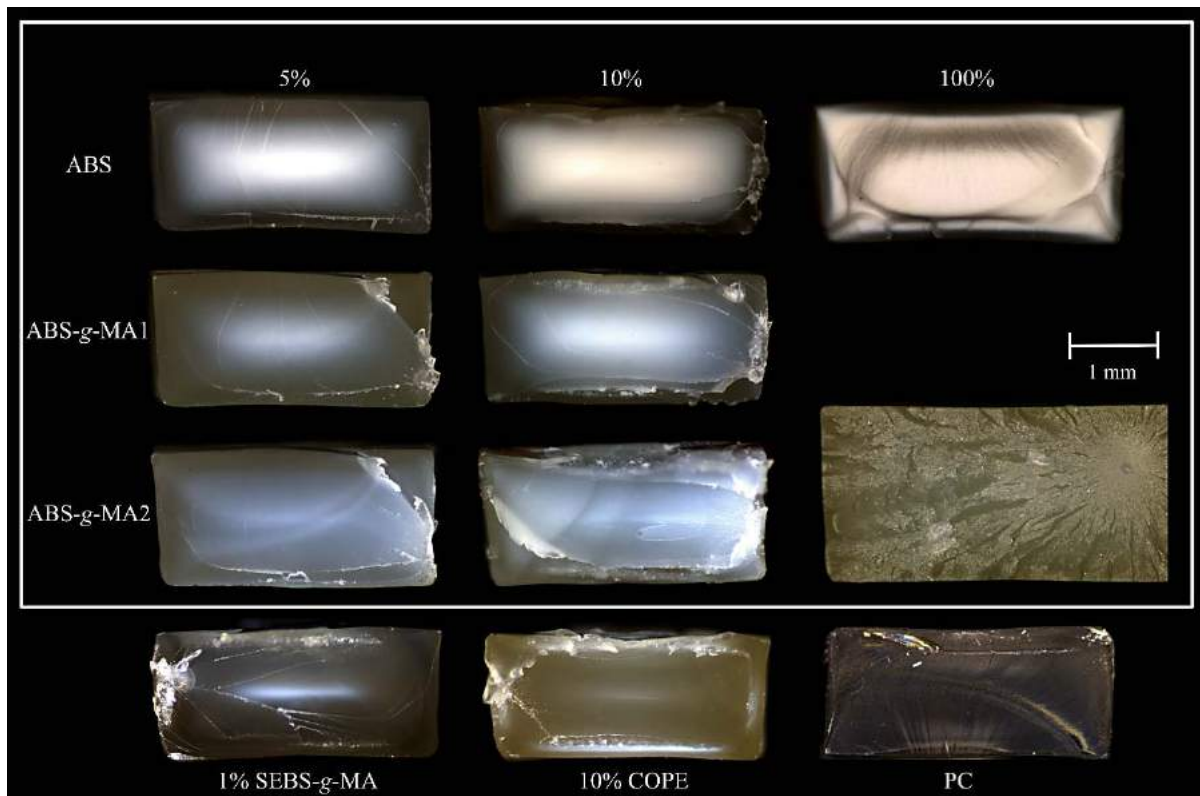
Cross-section view of the fracture tensile specimens at quasi-static conditions.
